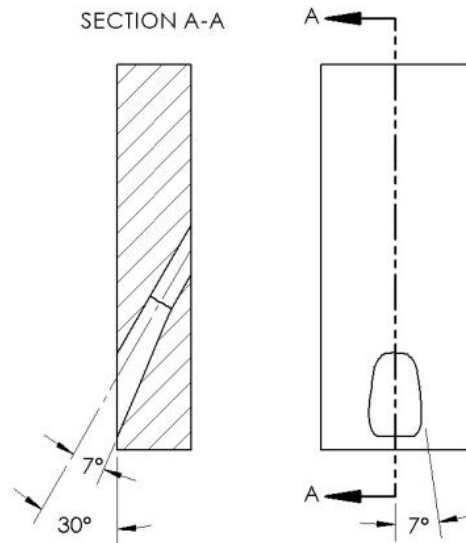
7° - 7° - 7° shaped hole geometry designed at PSU
